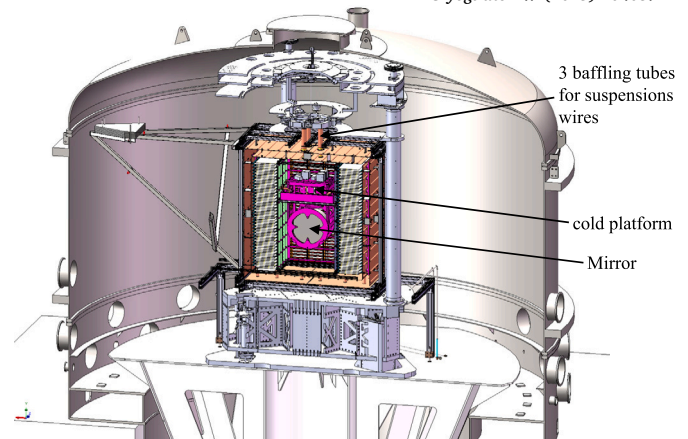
Prototype CAD cut view, showing the inner details of the radiative heat exchanger integration with the suspended payload.
